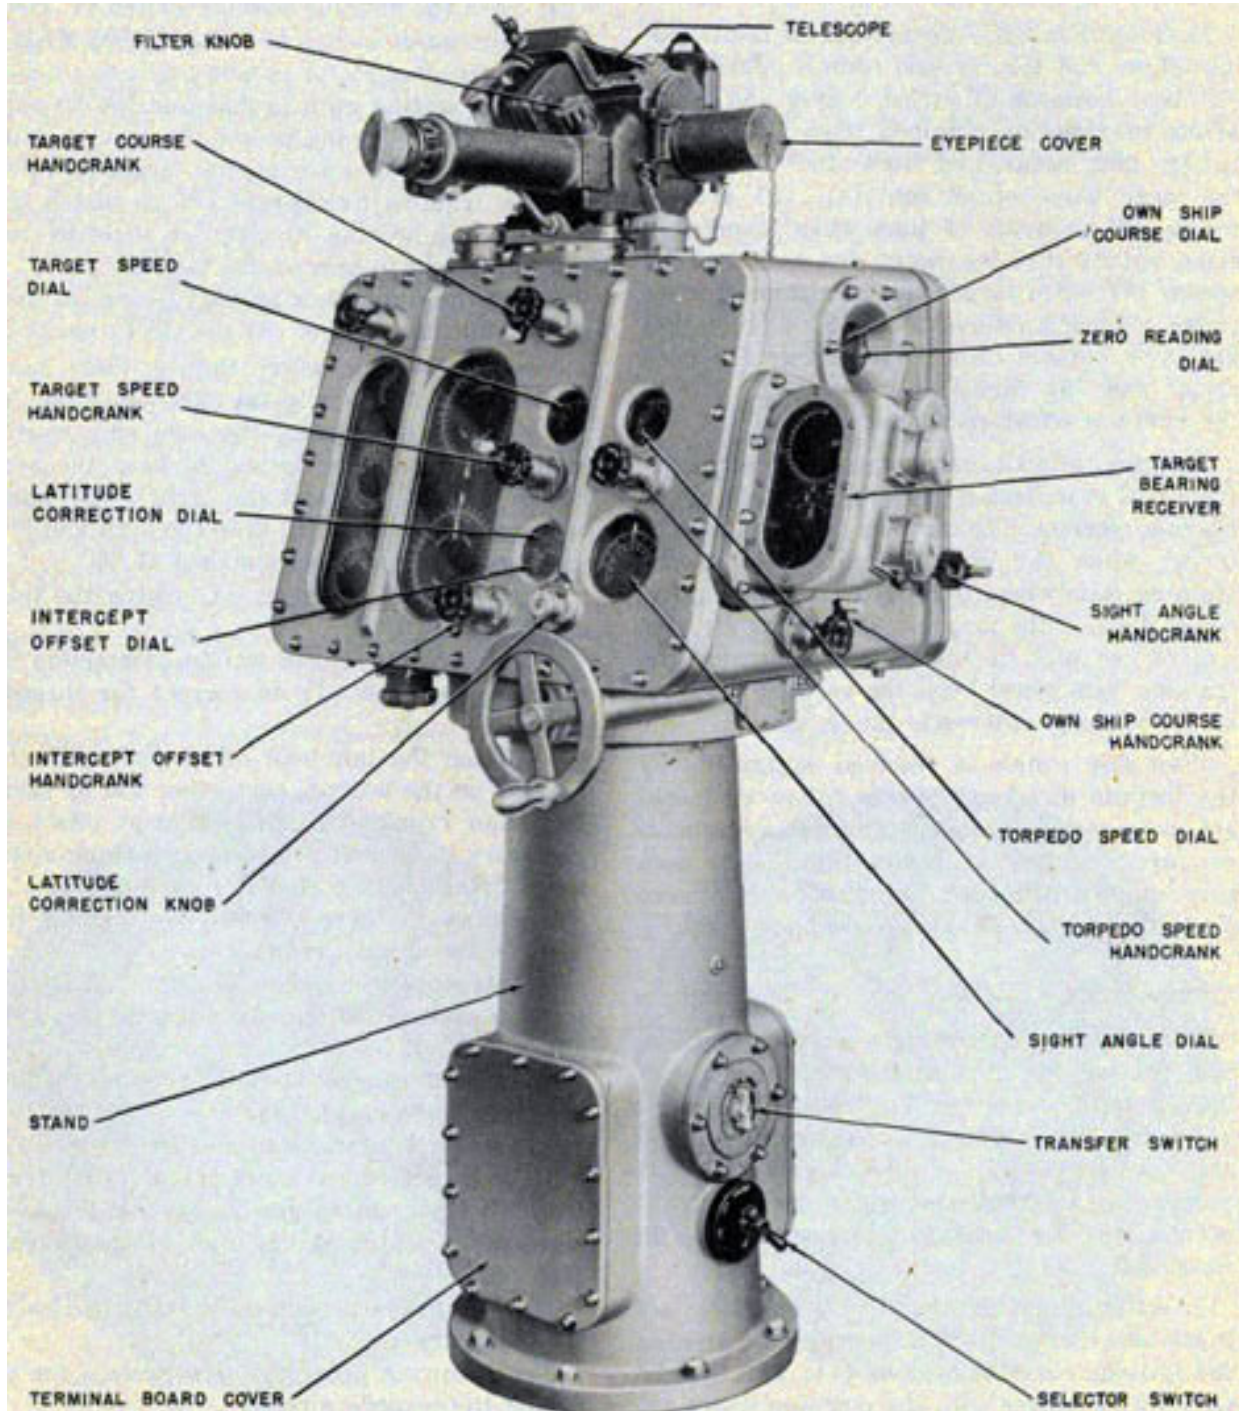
Front right view Torpedo Director Mk 27 Mod 5.
